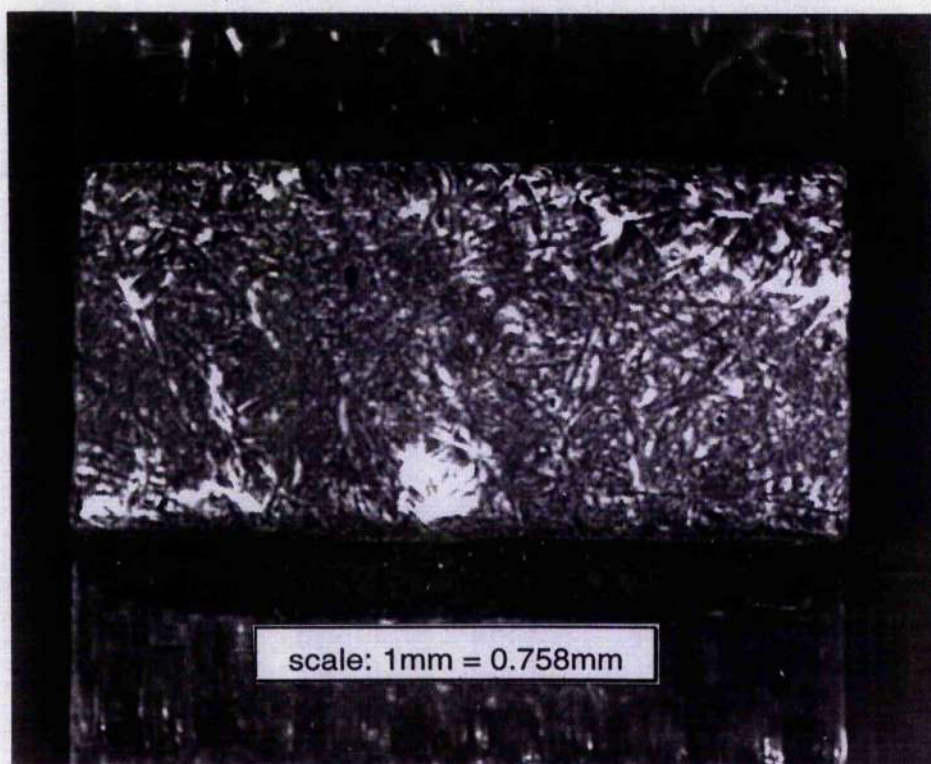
Fatigue failure surfaces in the pultrusion of the stressed attachment
